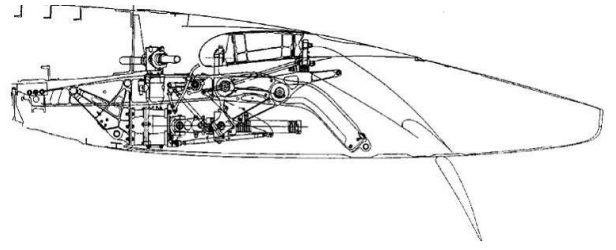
The outboard wing cross section of a Boeing 737-NG aircraft; van Dam 2002
